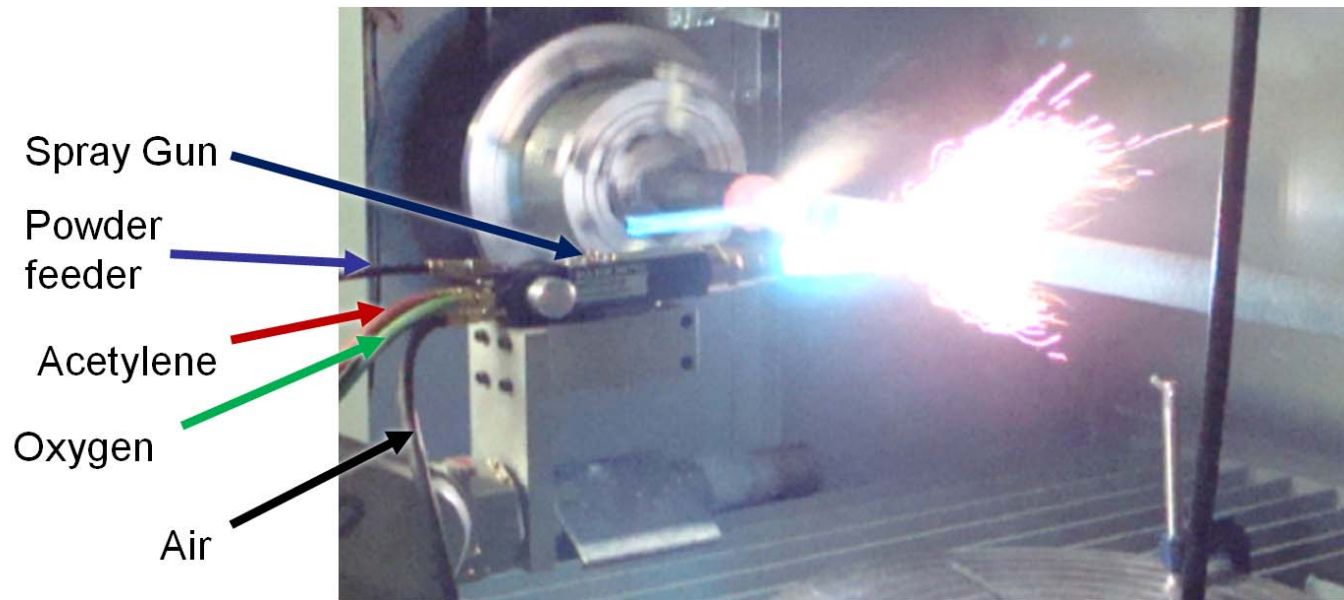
Flame spray deposition of a metal coating onto a FRPC pipe
